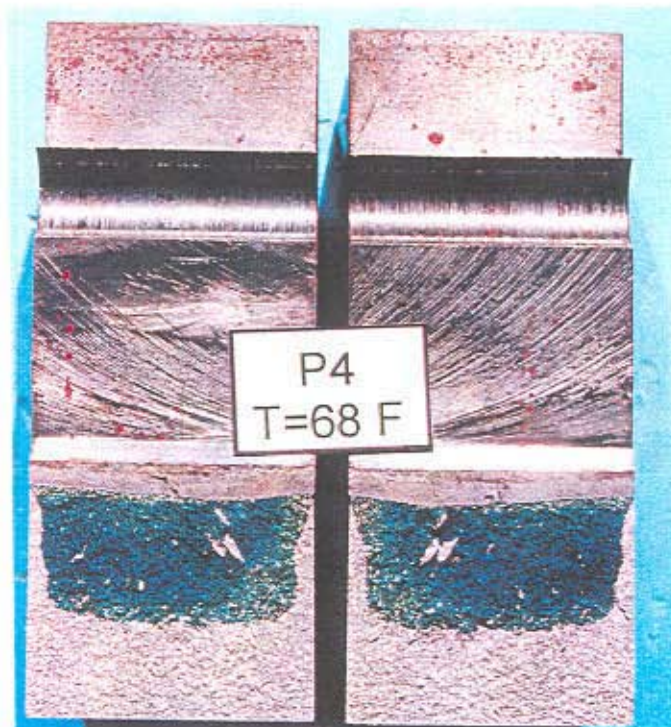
Fracture Surfaces of Test Specimen P4. (6/00/3-1)
